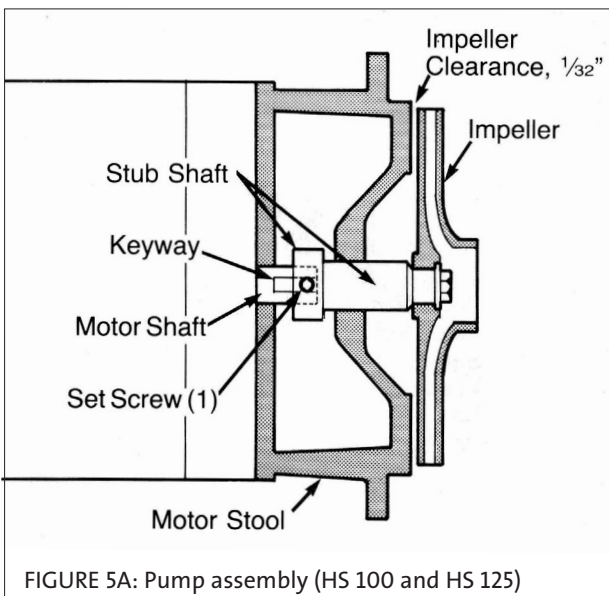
A: Pump assembly (HS 100 and HS 125)
